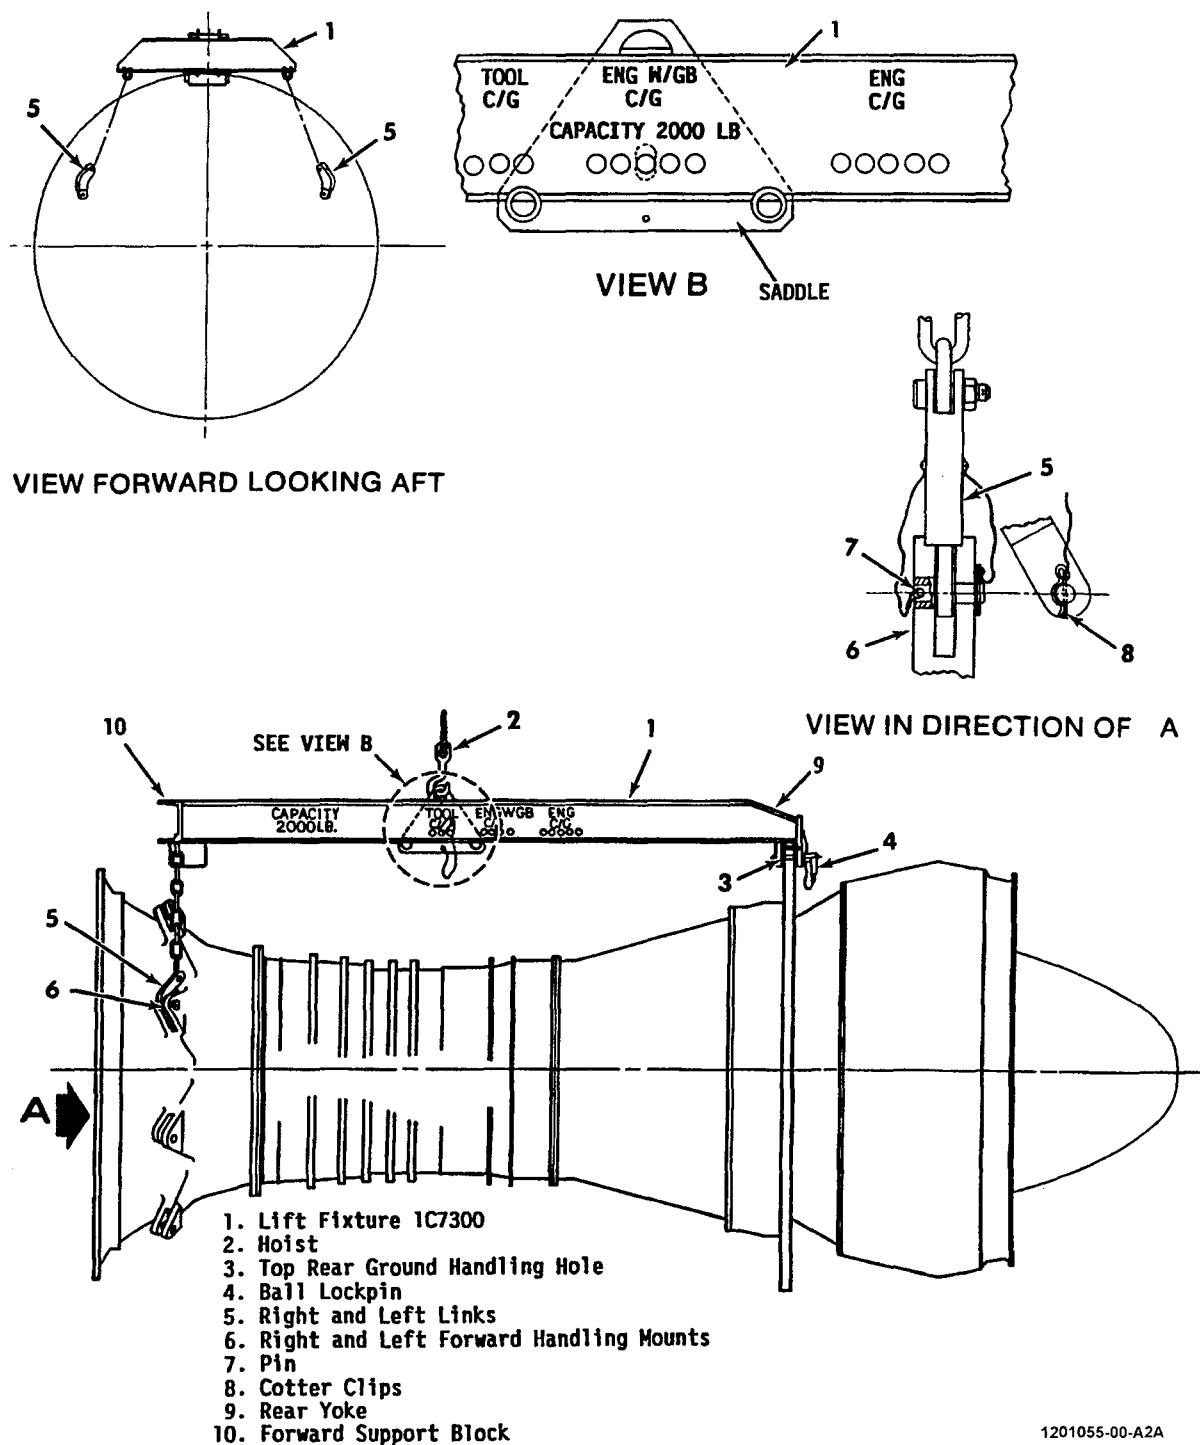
Lift Fixture 1C7300G01 Attachments to Gas Turbine
